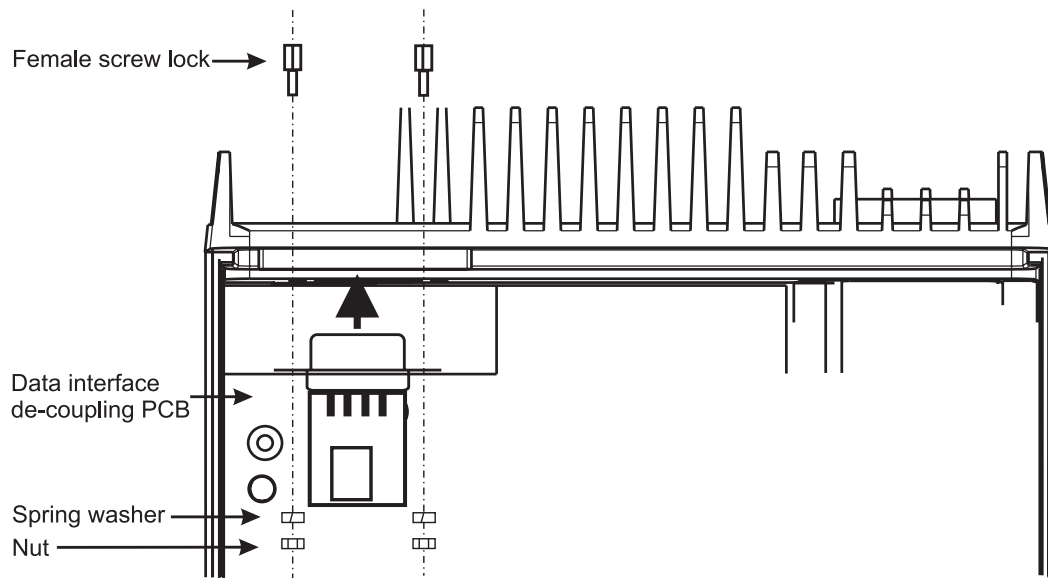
Data Interface Decoupling PCB Mounting: Series II Chassis
